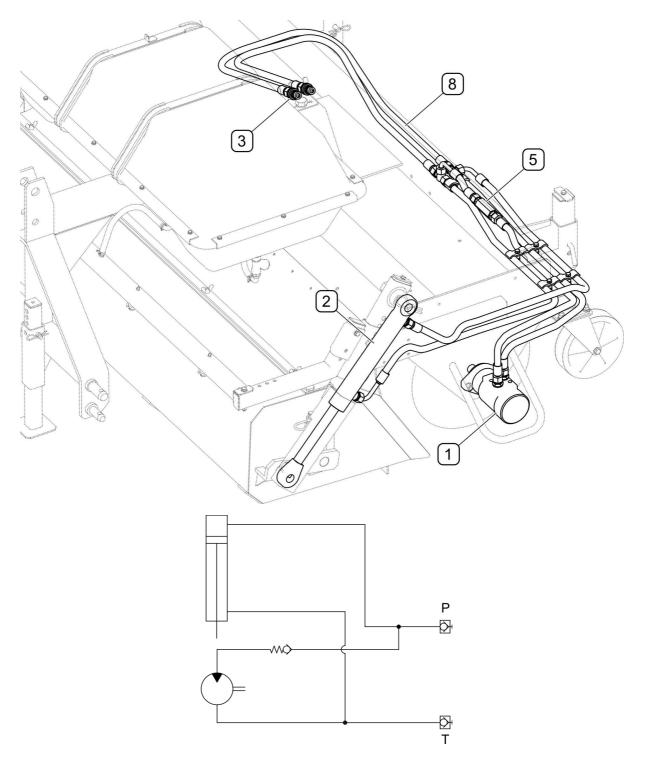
A Design of hydraulic system of ZM-1600 and ZM-1600-02 sweepers
